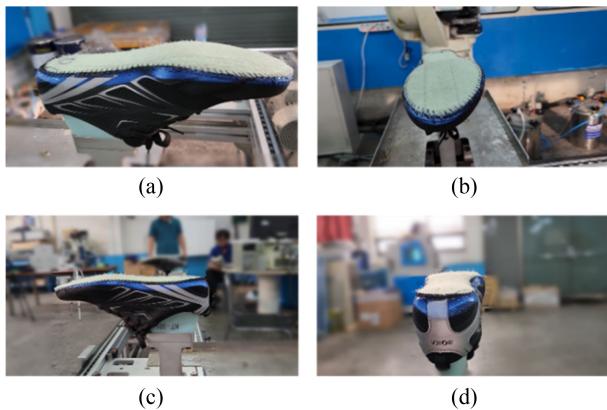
Result of the experiment (a): right side view, (b): front view, (c) left side view, (d) rear view
